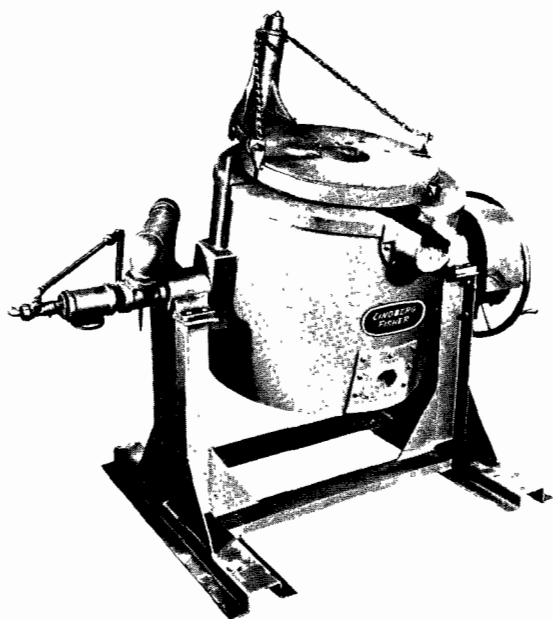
Tilting crucible furnace (Lindberg Engineering Co., Downey, Calif.).
